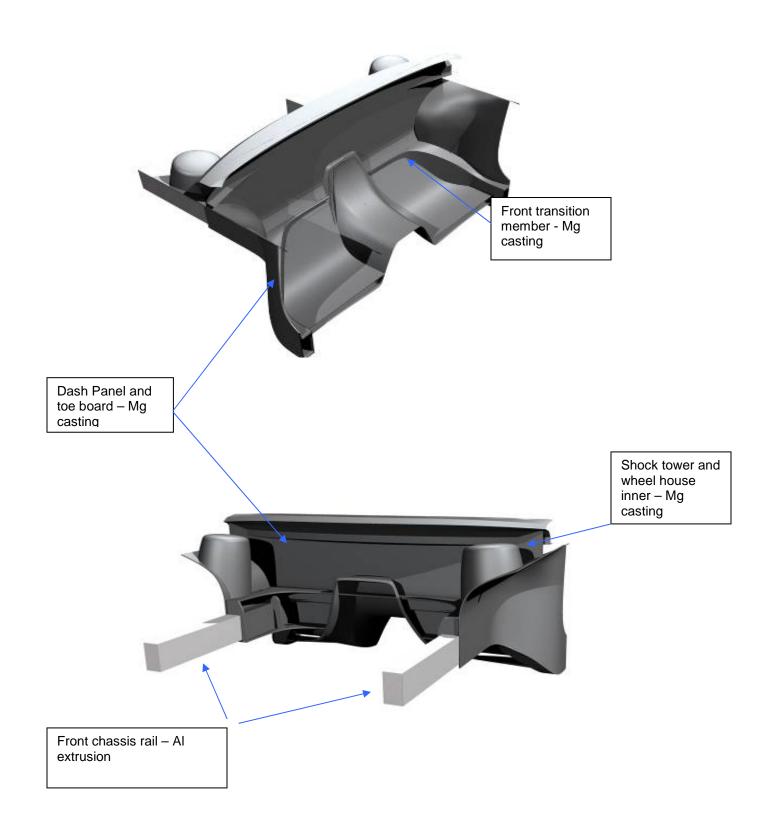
e: Dash Panel and Front Structure Assembly
